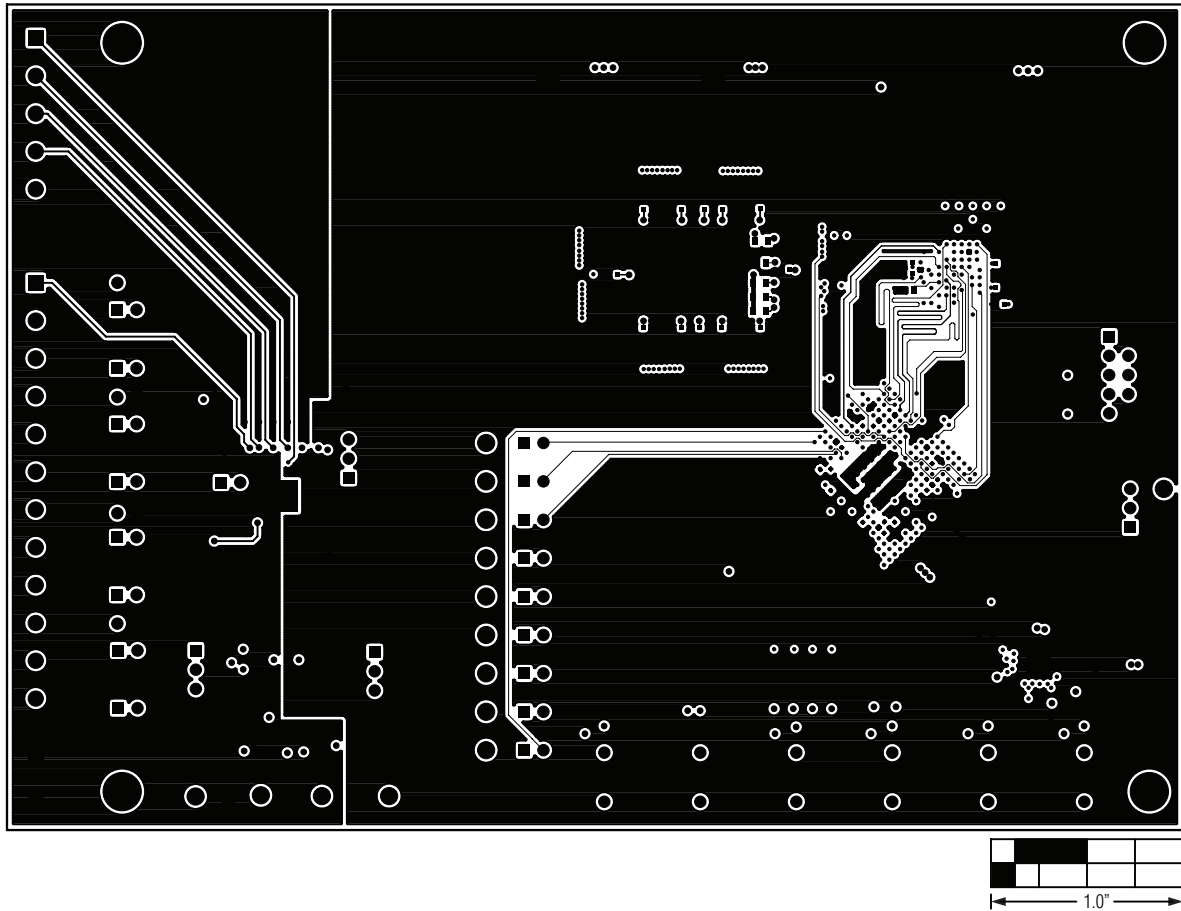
MAX11043 EV Kit PCB Layout—Solder Side
